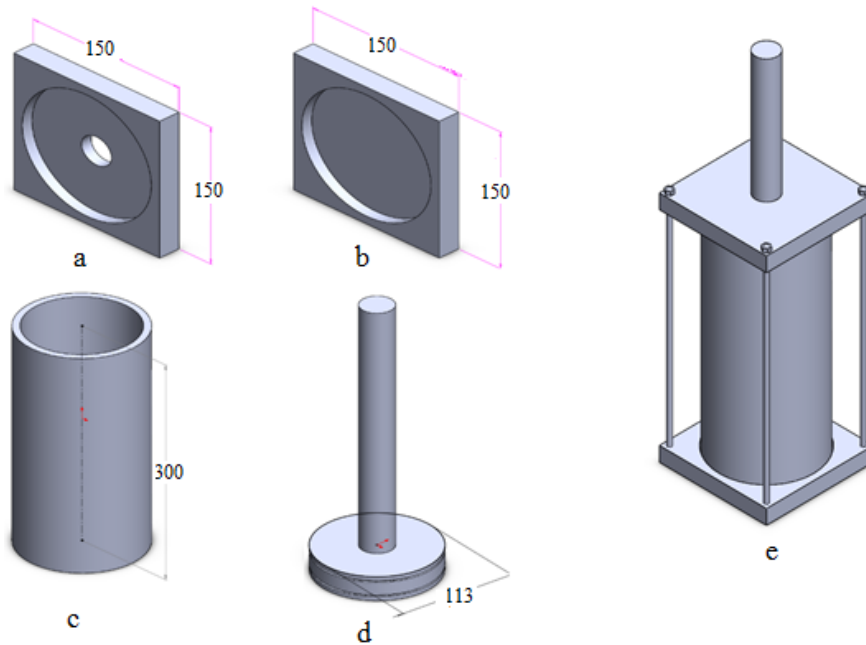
Parts: a) Upper Cover, b) Bottom Cover, c) Body of Cylinder, d) Head of Piston, e) assembly parts of test rig
